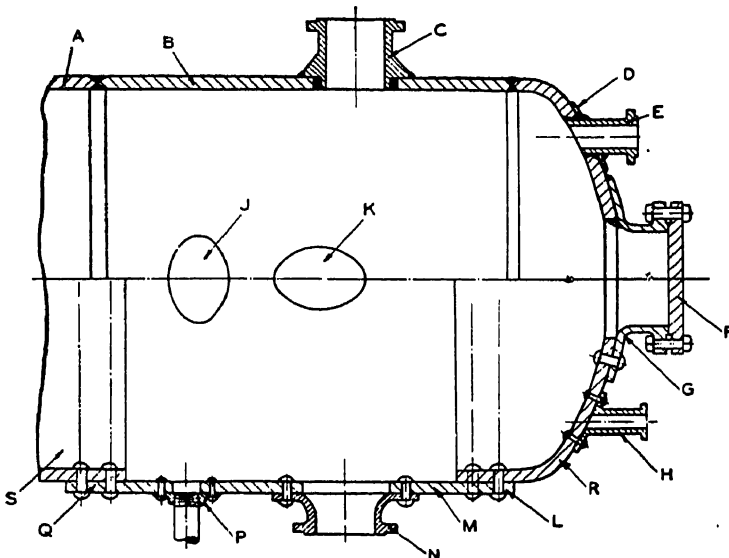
Representative Welded and Riveted Fittings.
